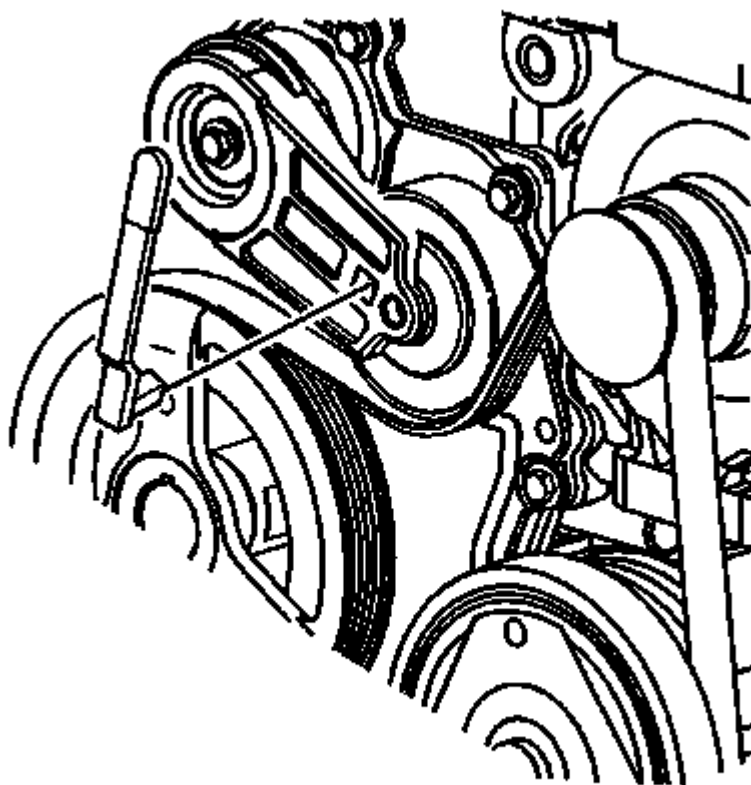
View Of Drive Belt Tensioner & Special Tool
